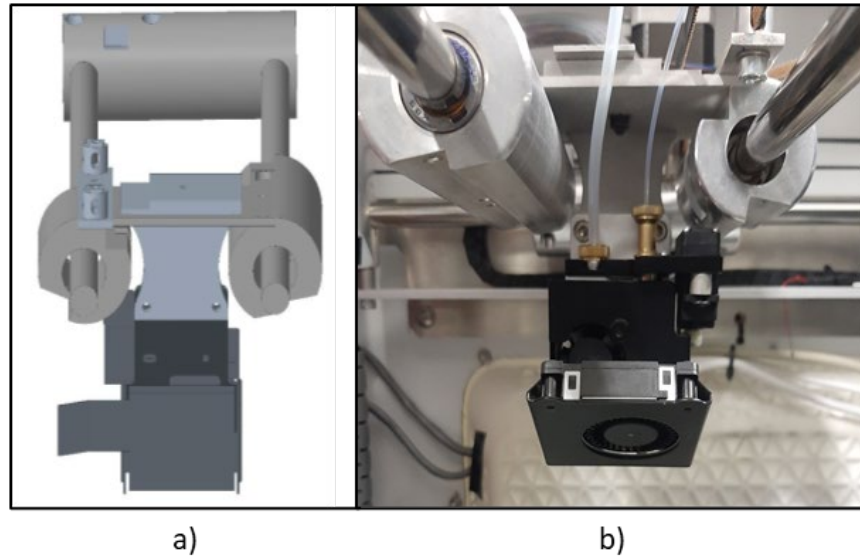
New printhead fixing system: (a) CAD view and (b) specific view
